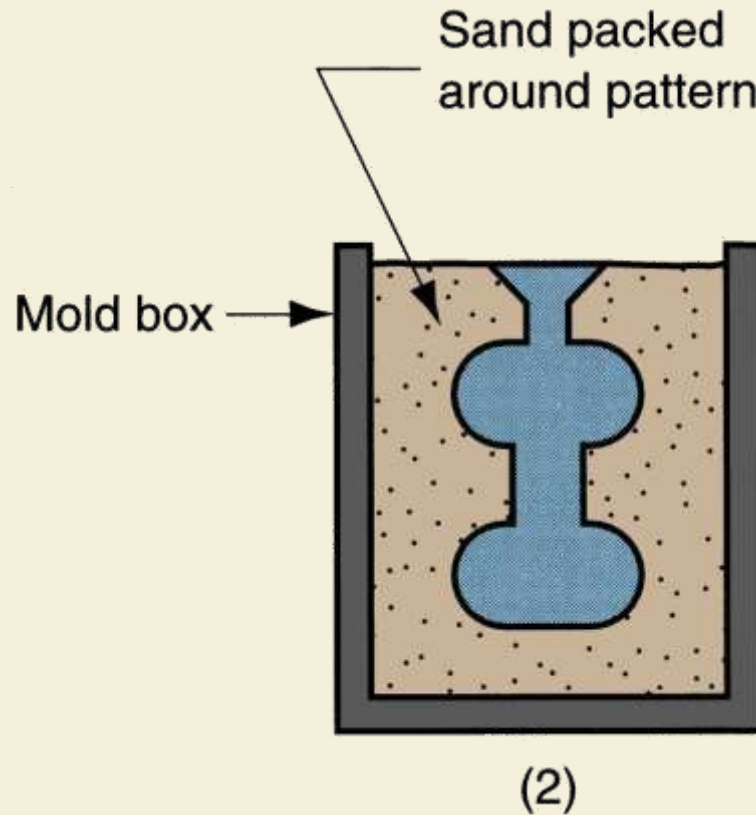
Expanded polystyrene casting process: (2) foam pattern is placed in mold box, and sand is compacted around the pattern;
